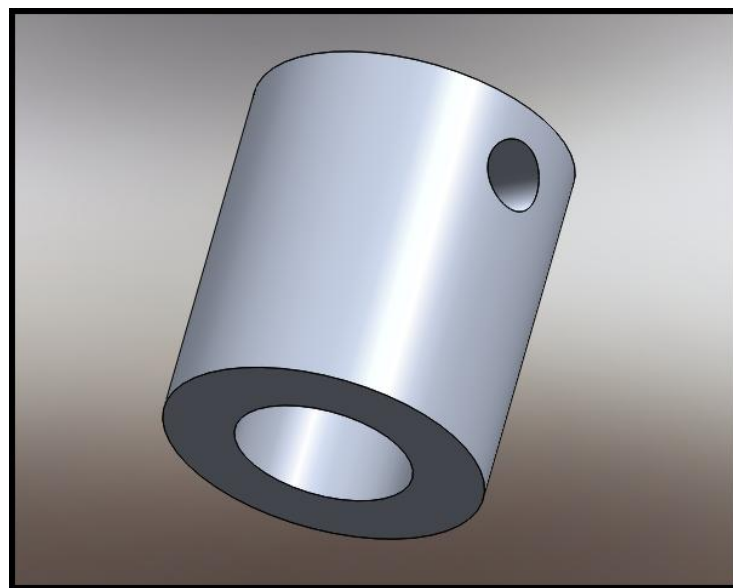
200RPM, heavy duty 12V dc gear motor fixing bracket
